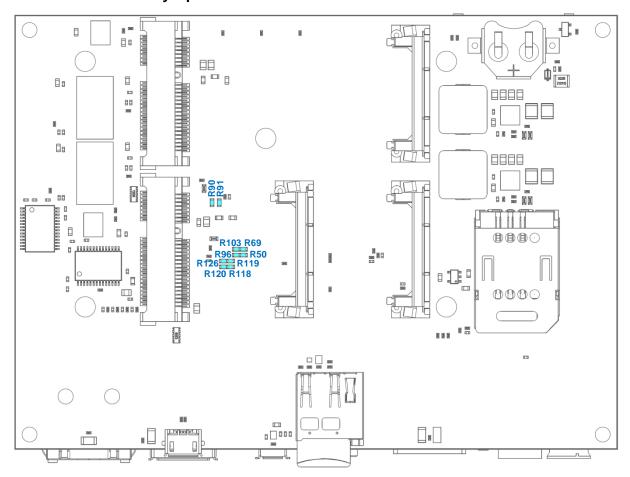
Ixora Carrier Board Assembly Options - Bottom Side
